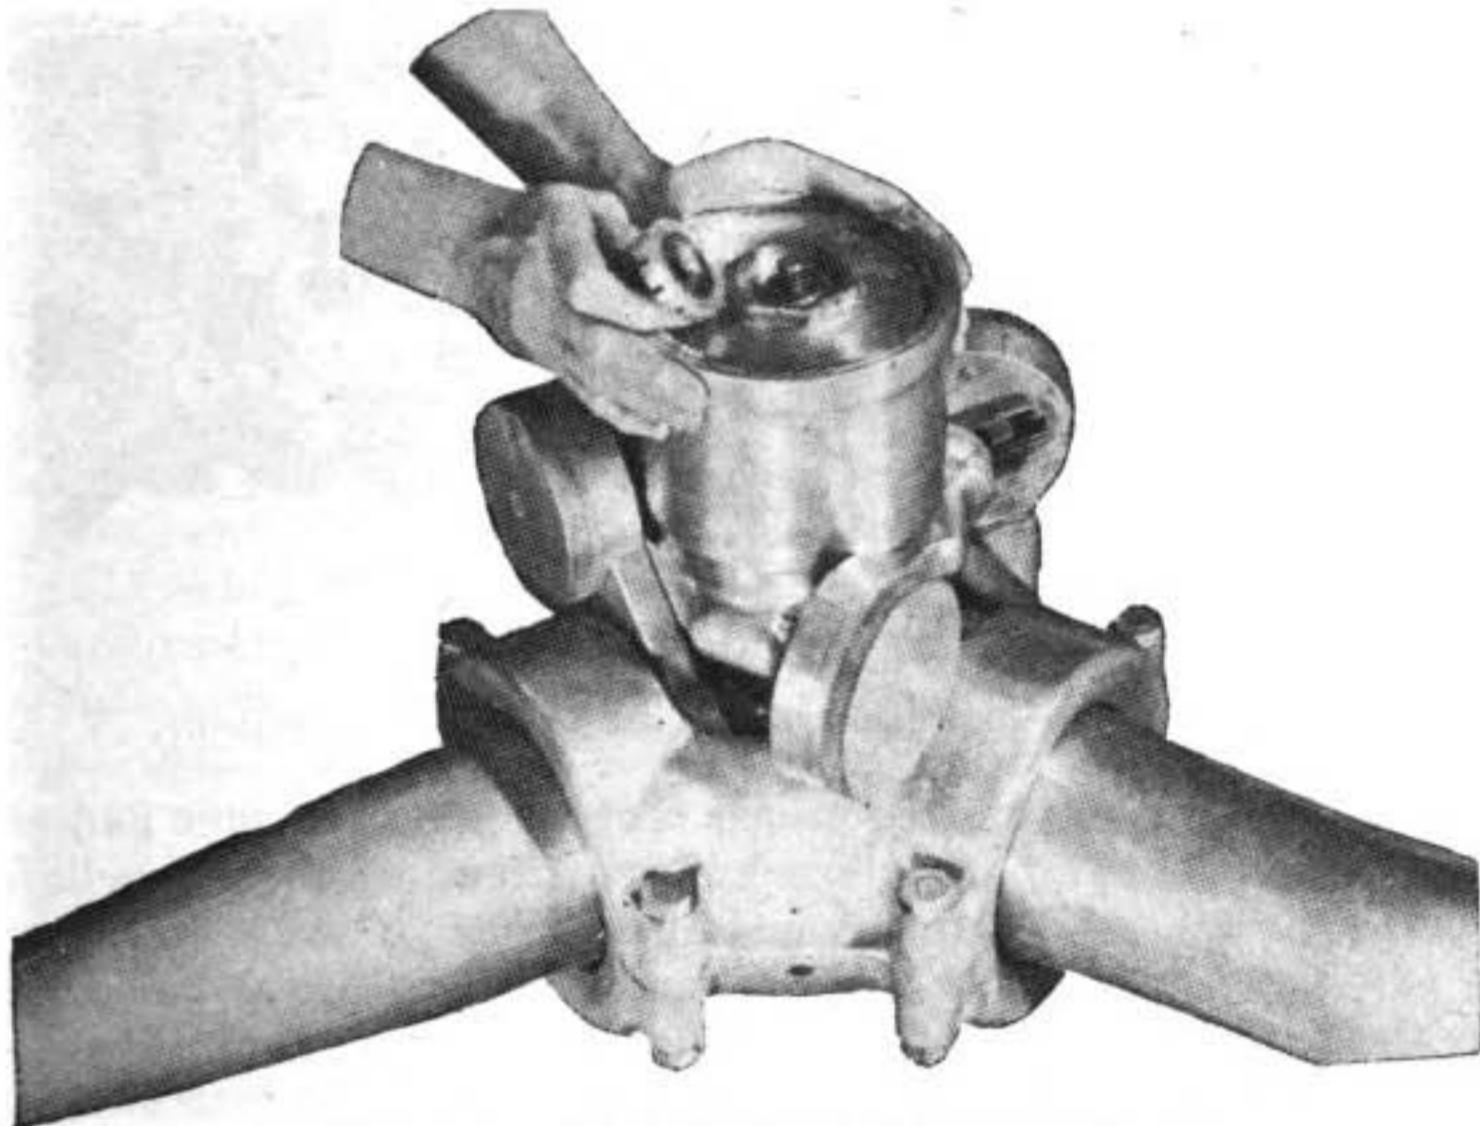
Removal of clamp nut and vernier lock plate.
